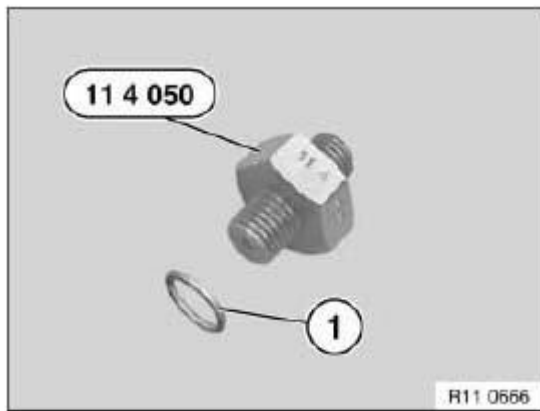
Identifying Special Tool (11 4 050) And Sealing Ring
